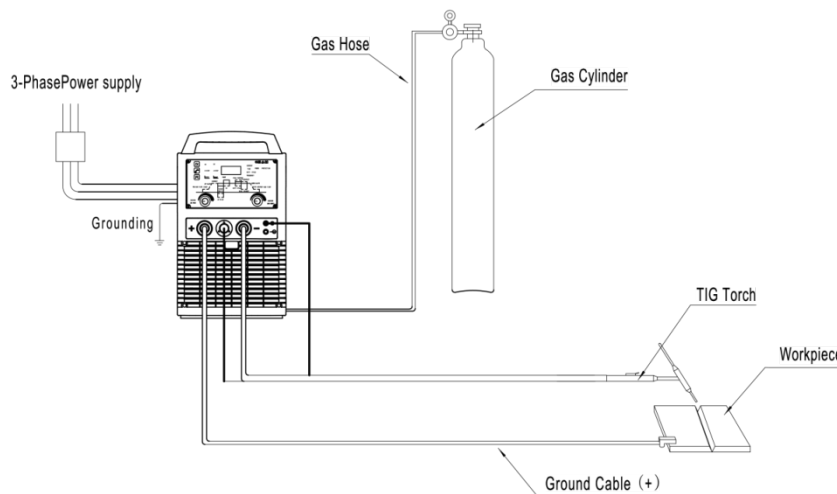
Connection and operation for gas-cooling TIG welding
